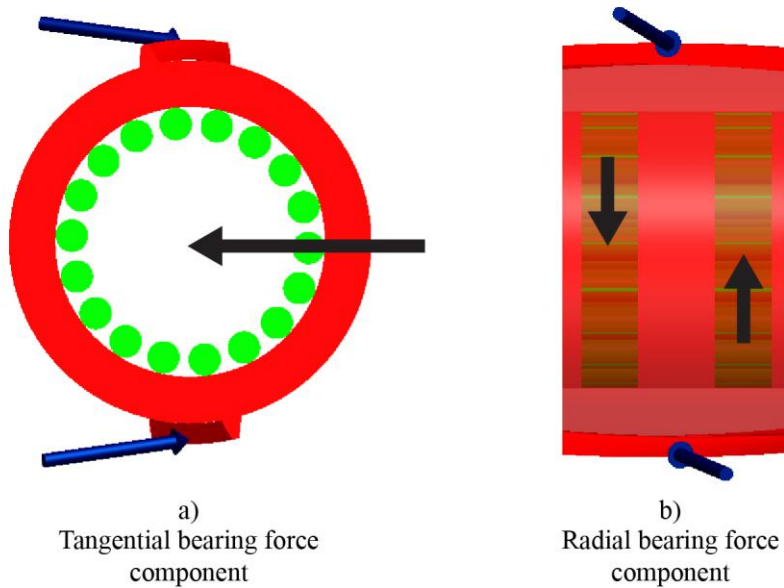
Schematic of a loaded helical planet gear. a) Radial contact force components cancel, while tangential components add up and are compensated by the bearings. b) Axial contact force components cancel but generate a tilting moment which is balanced by bearing radial forces.
